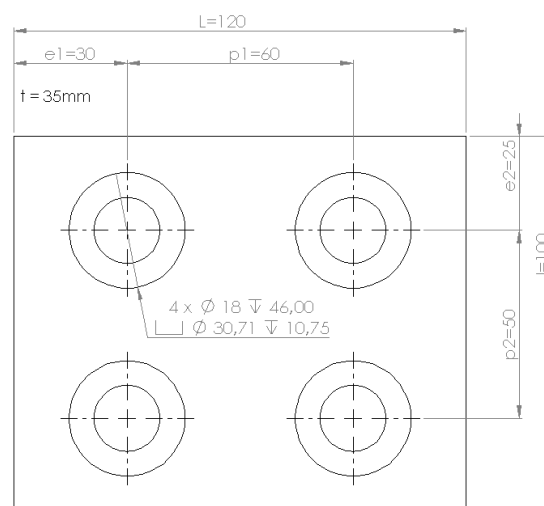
Technical drawing of the equivalent plate of the brake bearing.
